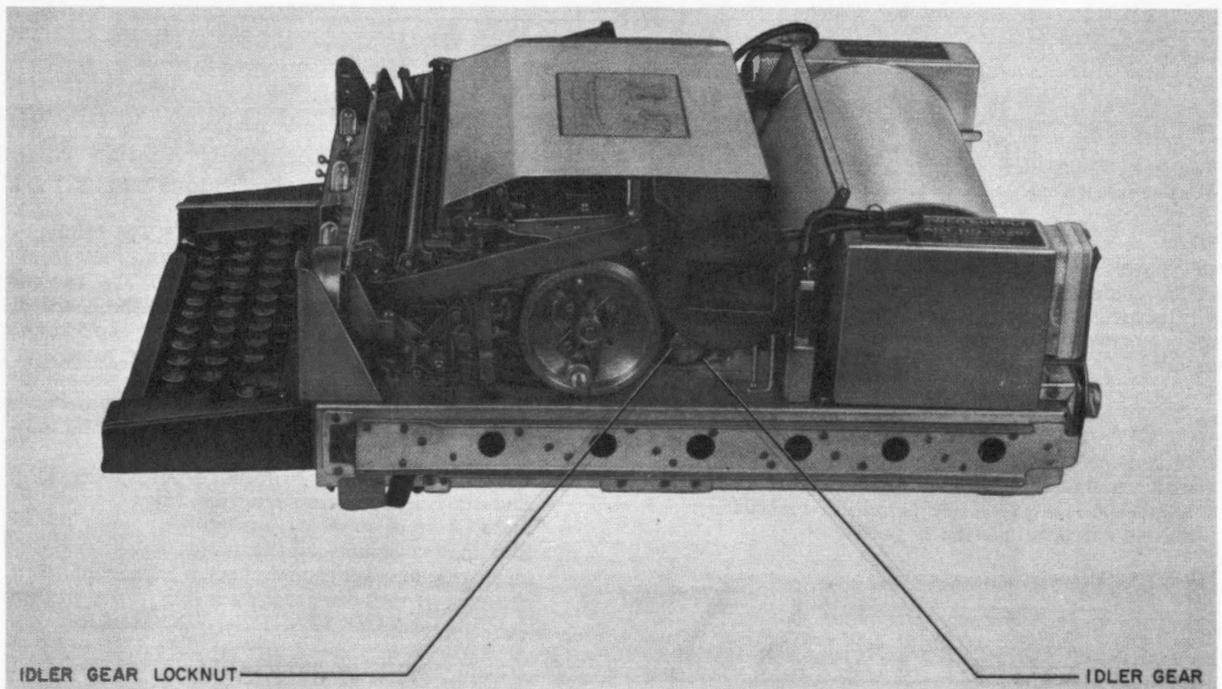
Printer and Electrical Chassis, Right-Side View
